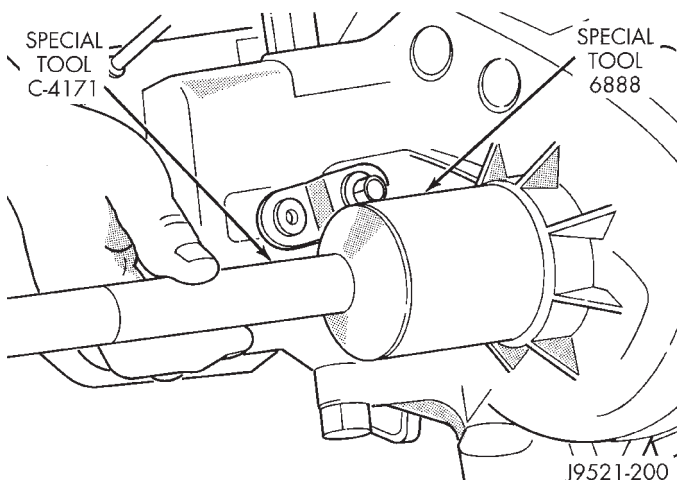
Starting Front Output Shaft Seal Into Case Bore
